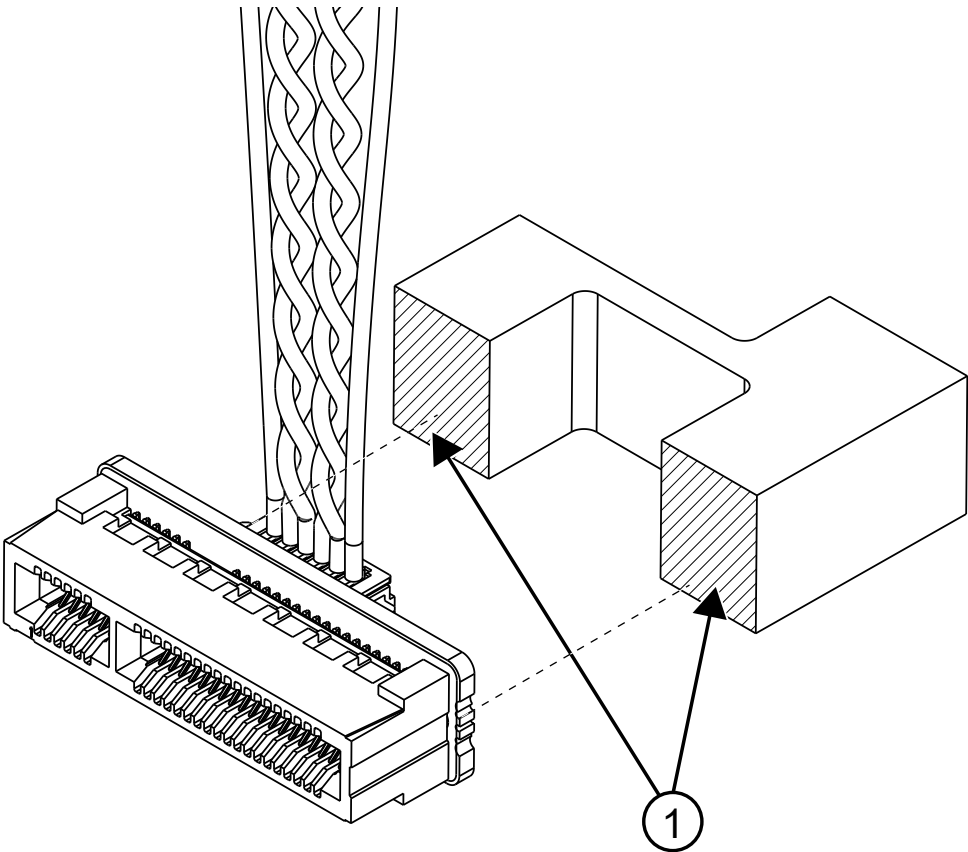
Connecting the Ethernet Faceplate Assembly to the Edge Card
